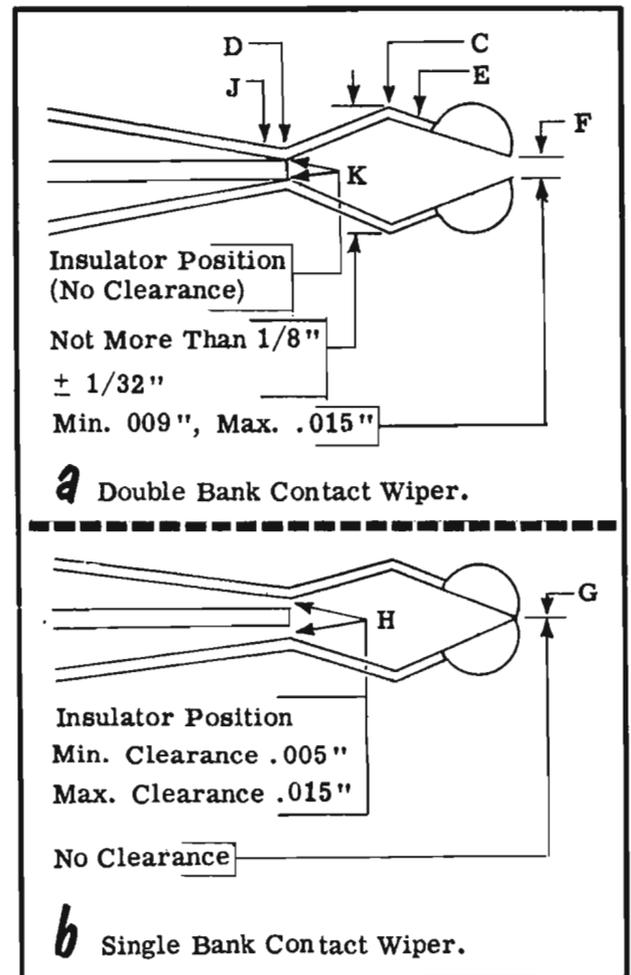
Wiper Tip and Insulator Clearance Requirements.
